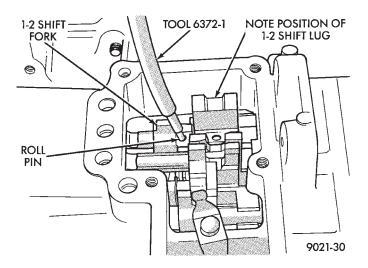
Remove 1-2 Shift Fork Roll Pin
